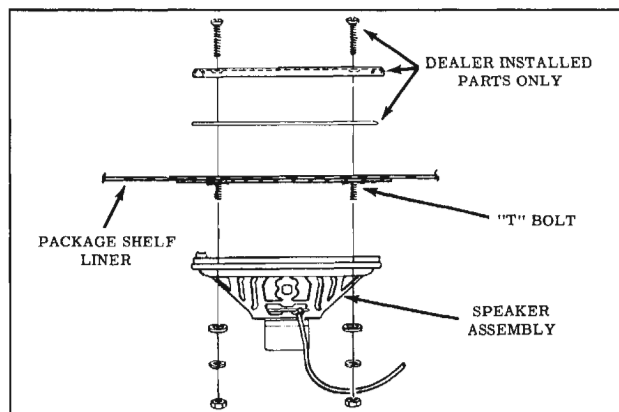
Rear Seat Speaker (Except 35, 45 & 67)
